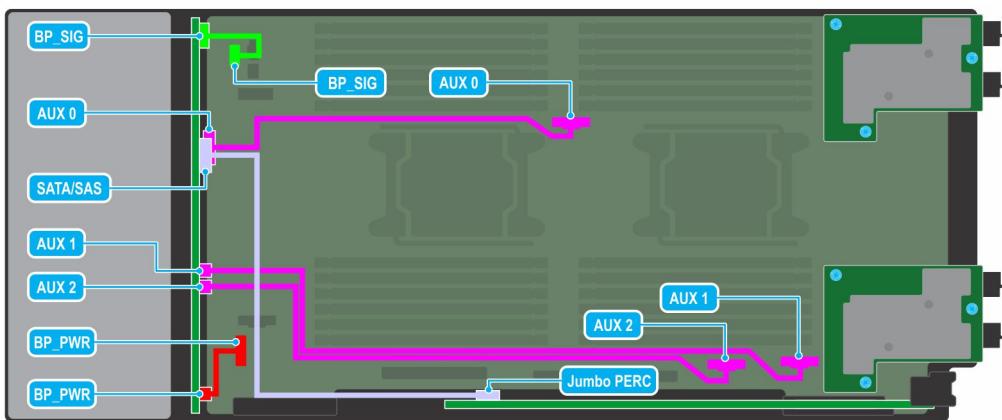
Cable routing - 6 x 2.5-inch backplane with Jumbo PERC card
